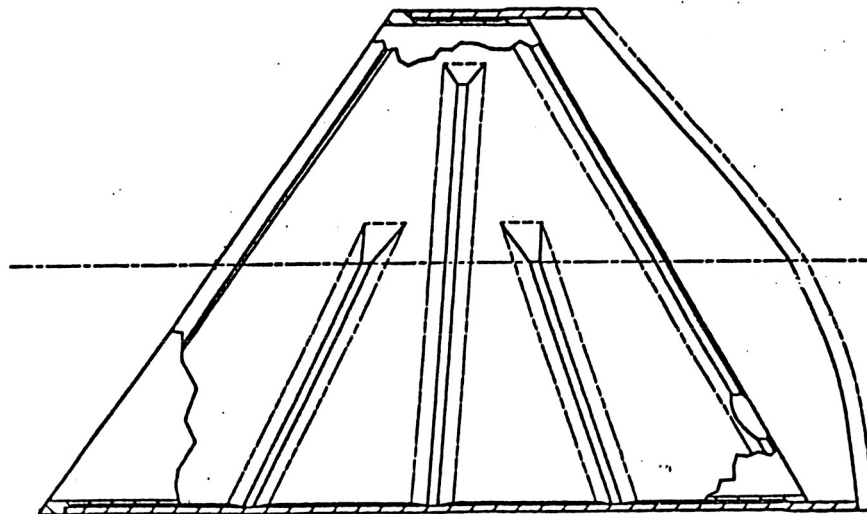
New HGM Liner Design with Integrally Machined Motion Limiters
